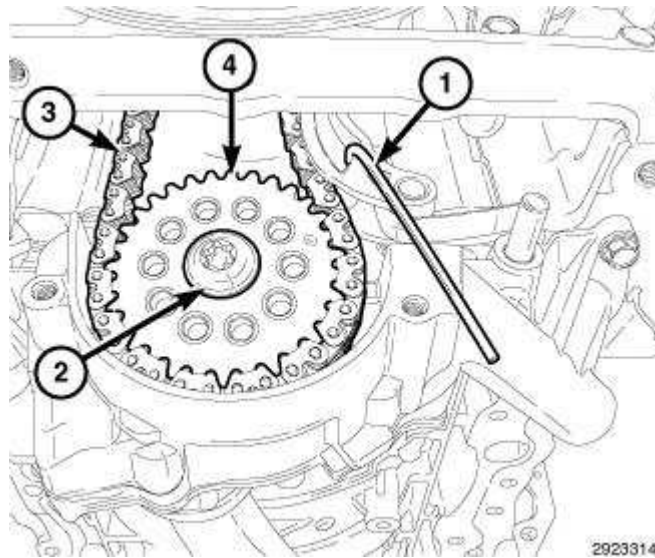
Retaining Pin, Retaining Bolt, Oil Pump Chain & Sprocket
